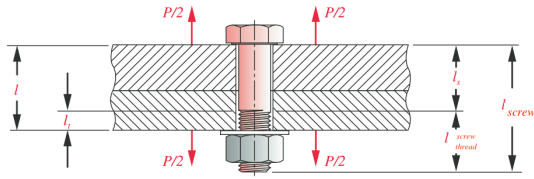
Bolted joint under external tensile load. Adapted from (Norton, 2010).
